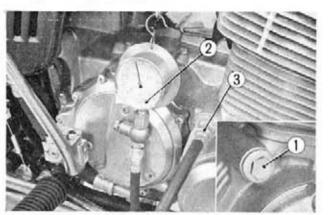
① Oil path cap ② Oil pressure gauge
